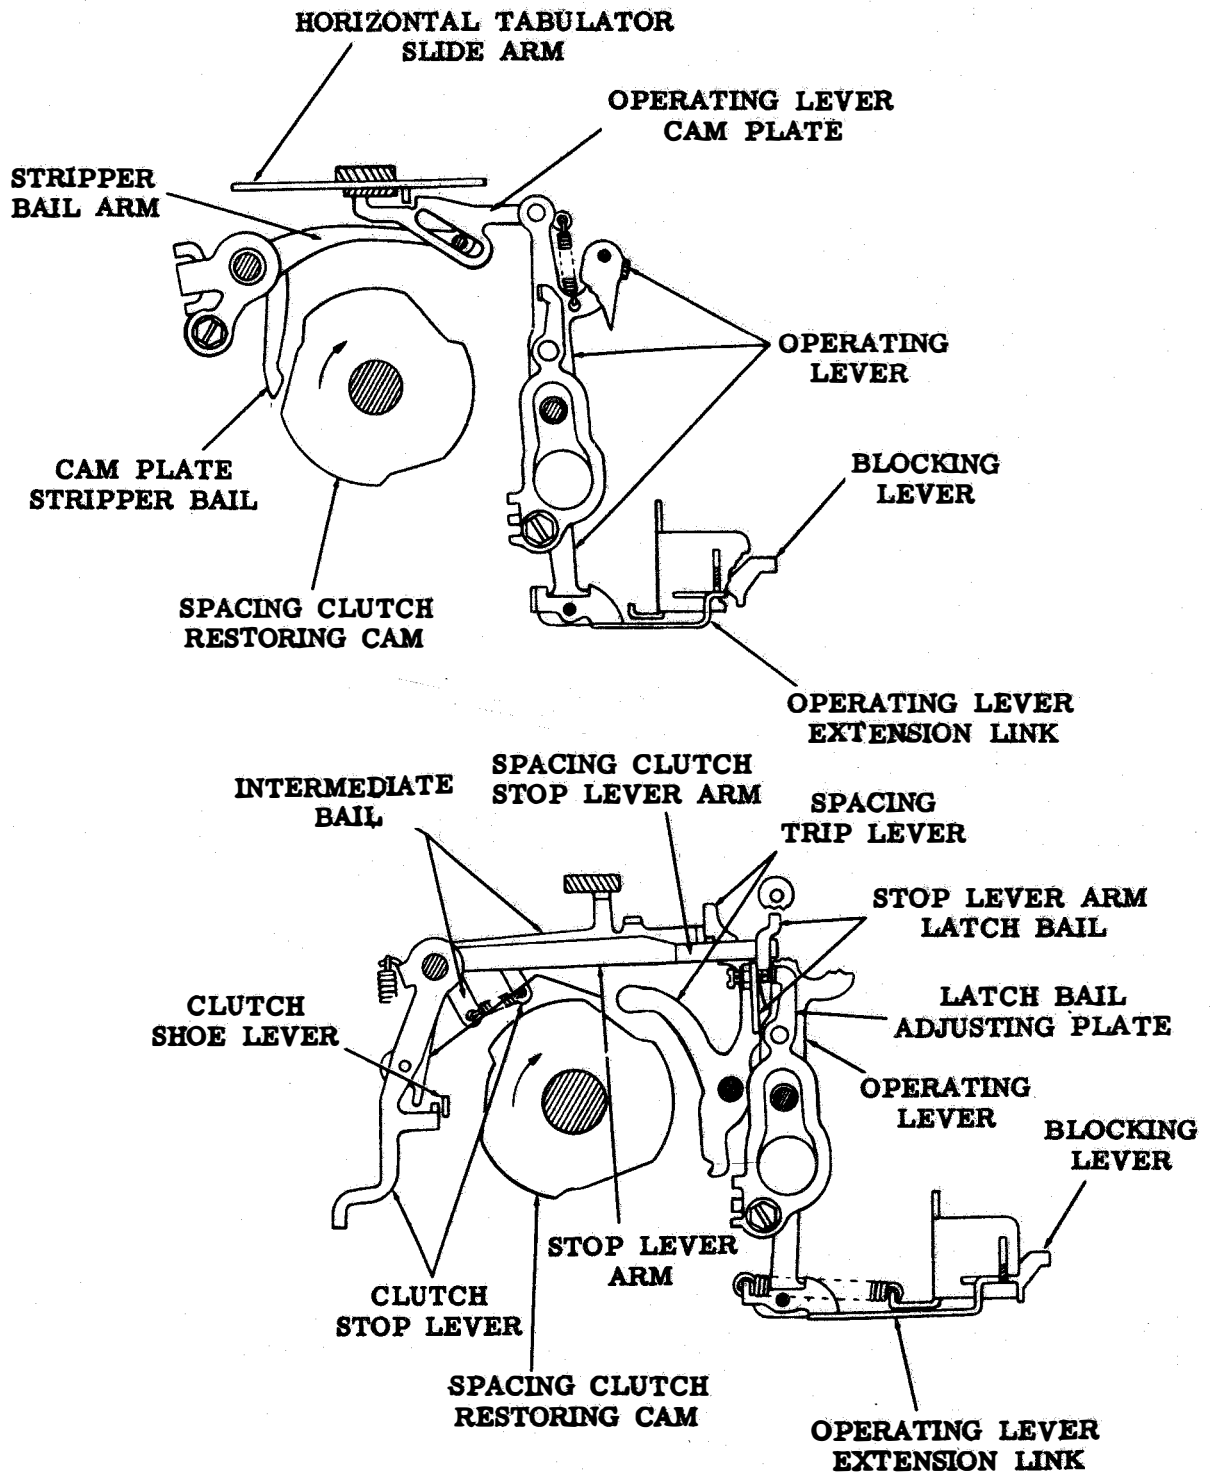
Horizontal Tabulator Mechanism, Left Side View
